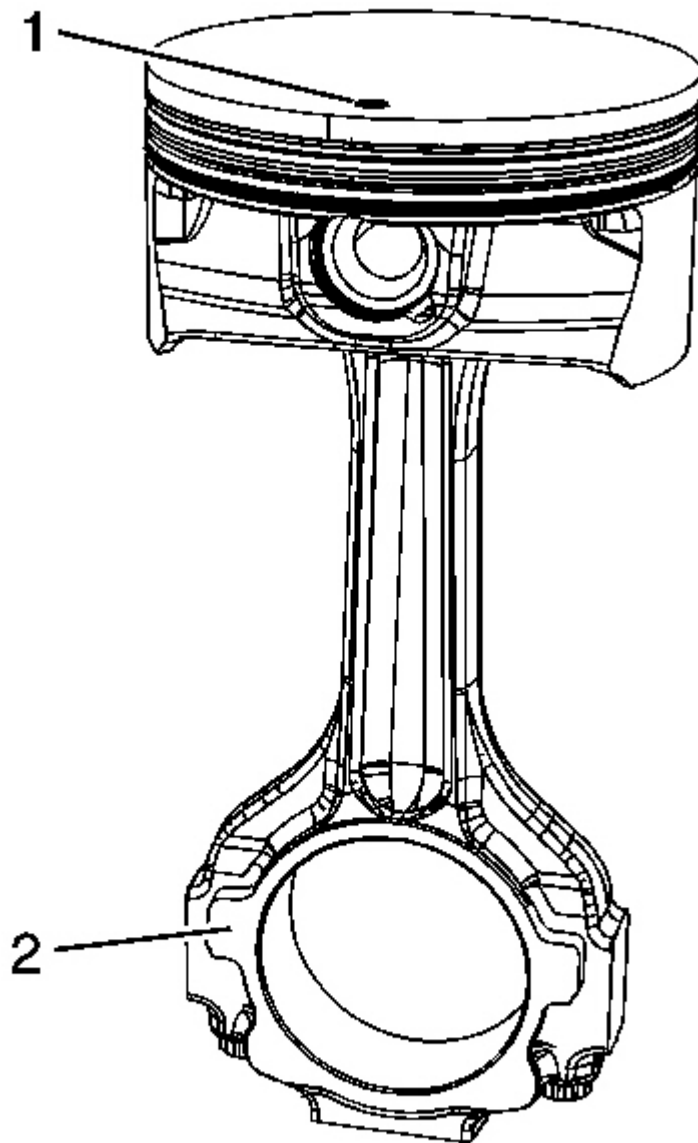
View of Mark On Top Of Piston & Connecting Rod Tab
